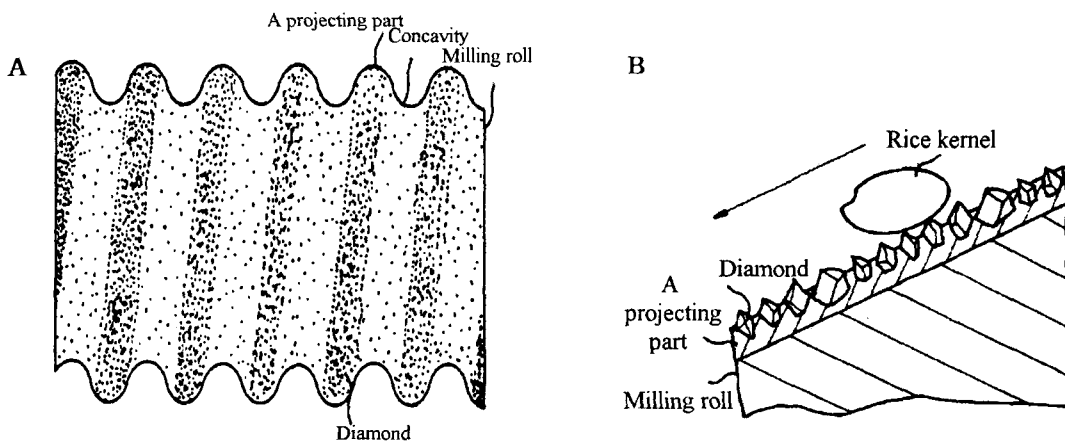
Diagram of milling roll and electroplated diamond of newly designed abrasive milling machine. A: A front view of milling roll, B: Detailed view of surface of projecting part.
